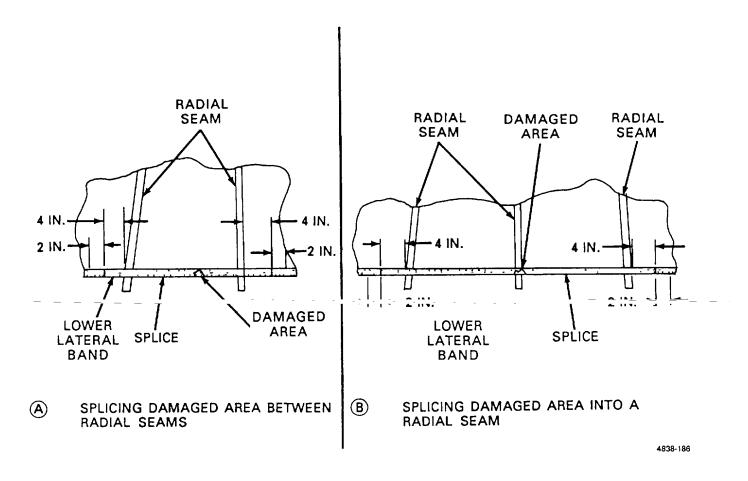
Skirt Reinforcement (Lower Lateral Band) Splice Details.
